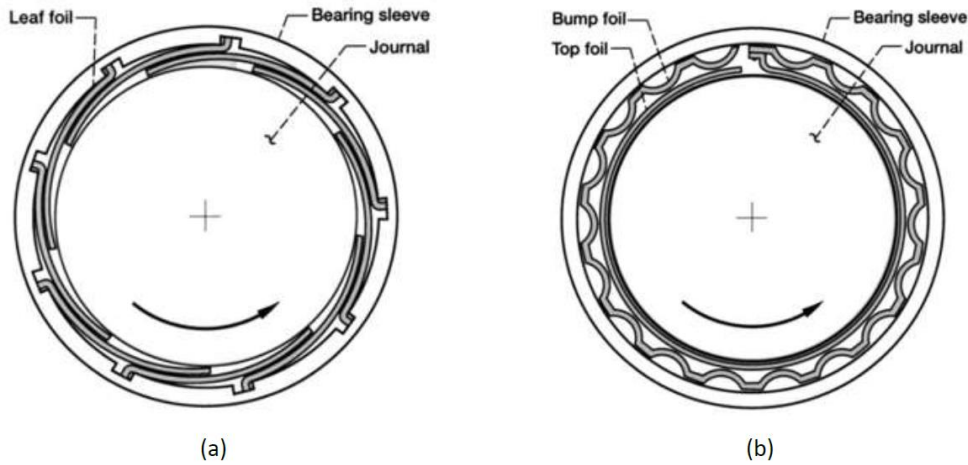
First generation foil bearings with axially and circumferentially uniform elastic support elements: (a) leaf type foil bearing, (b) bump type foil bearing. [45]
